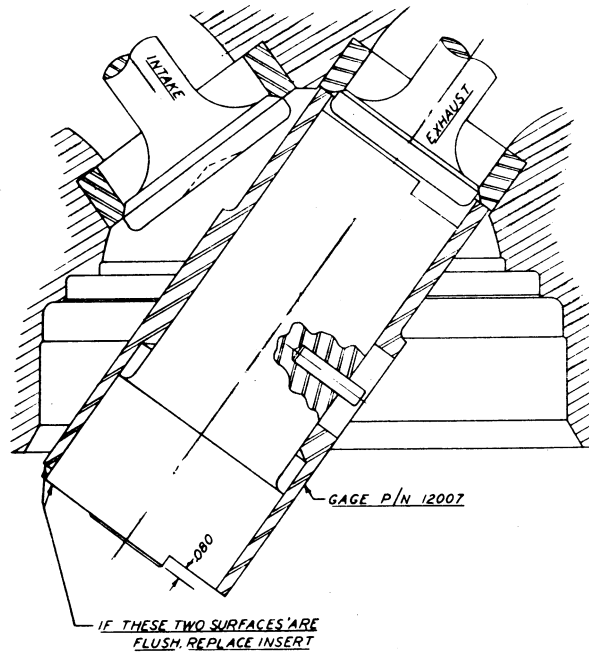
METHOD FOR CHECKING EXHAUST VALVE SEATING LIMITS
